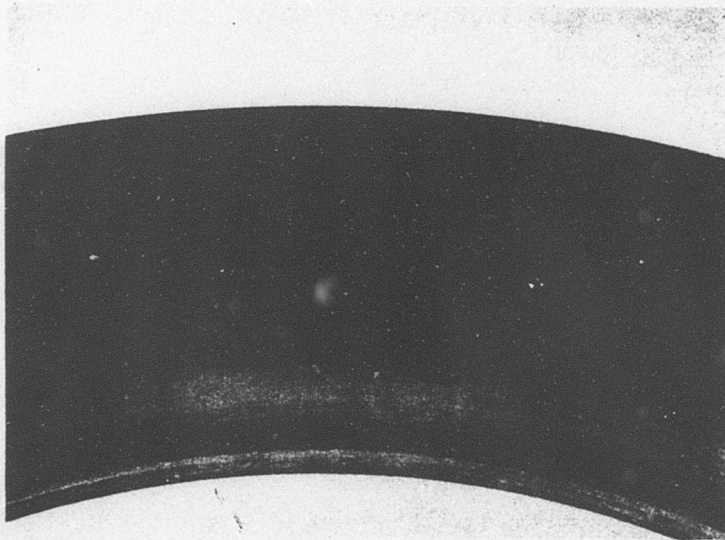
View of Cup Race Surface - Bearing S/N 73-59.
